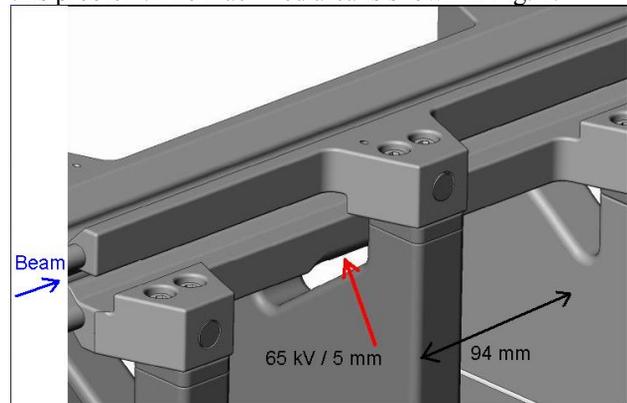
Back side of RFQ rods machined to avoid field emission to opposite voltage stem. Field in machined area is 65 kV per 5 mm. Red arrow marks the machined area.
